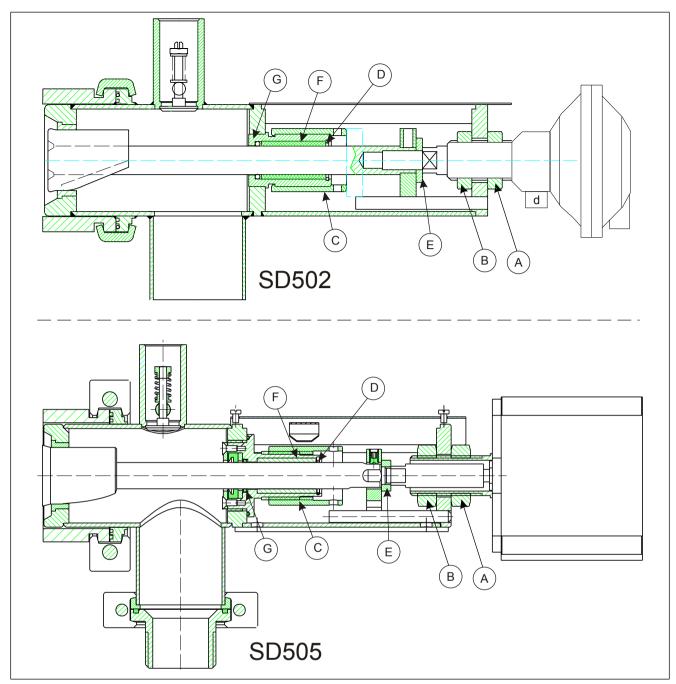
Valmet SD502/SD505: A & B - mounting screws, C - flow rate adjustment nut, D - locking ring, E - support ring, F - bearing bushing, G - piston shaft gasket.
